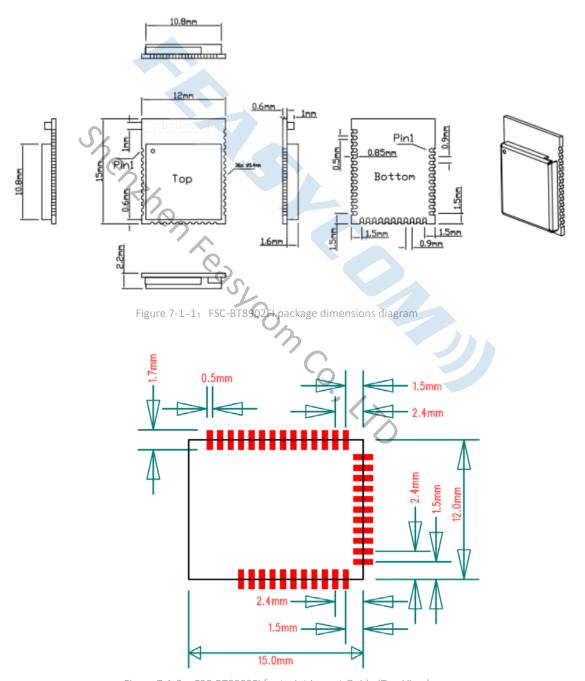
FSC-BT8902FI footprint Layout Guide (Top View)
